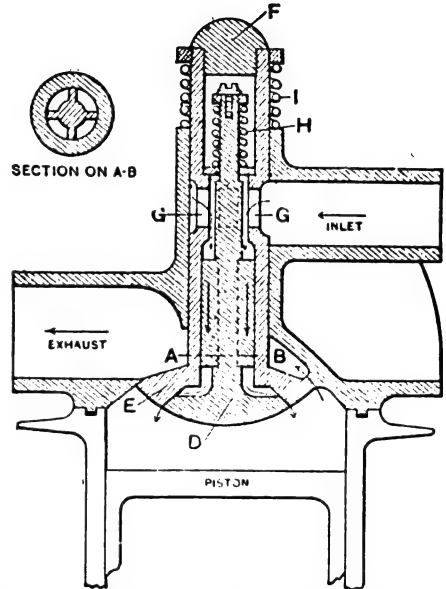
D'equlevilly Combined Inlet and Exhaust Valve
